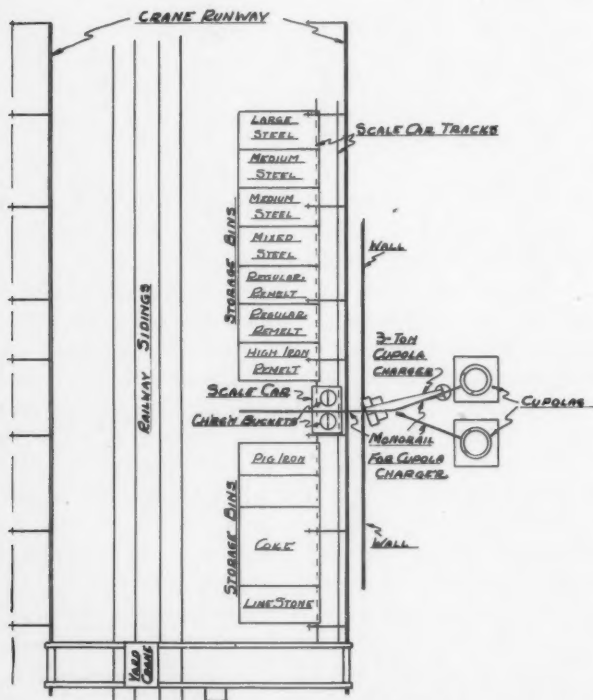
LAYOUT OF STORAGE BINS AND CUPOLA CHARGING ARRANGEMENTS.
